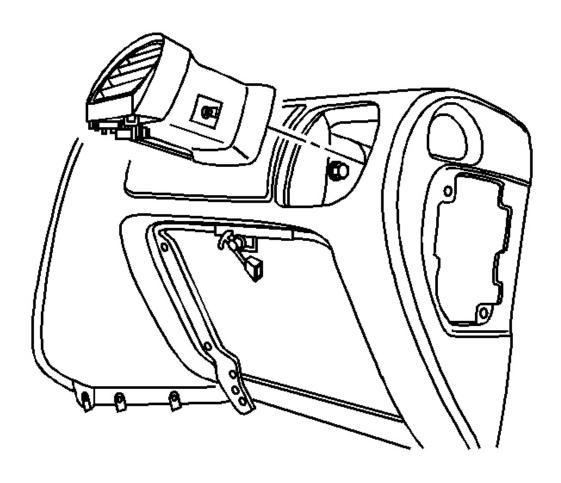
Removing/Installing Air Duct Extension Courtesy of GENERAL MOTORS CORP.
